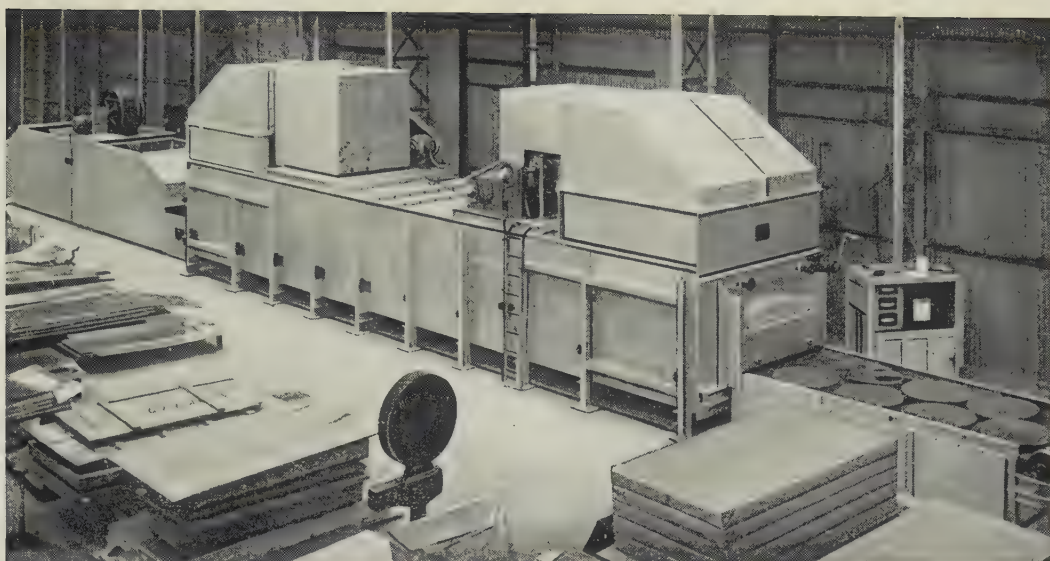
Single-Sheet, Conveyor-Type, Flash-Annealing Furnace.
